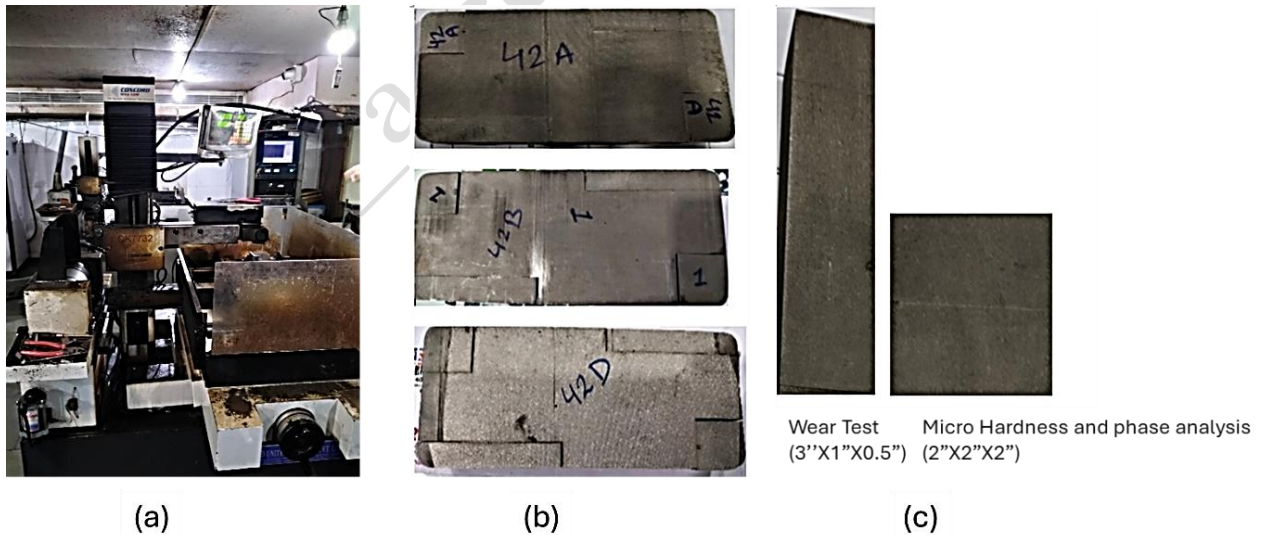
(a) The EDM Cutting Machine (b) Cutting Specimen (c) The test specimens for wear test and Micro hardness and phase analysis.
